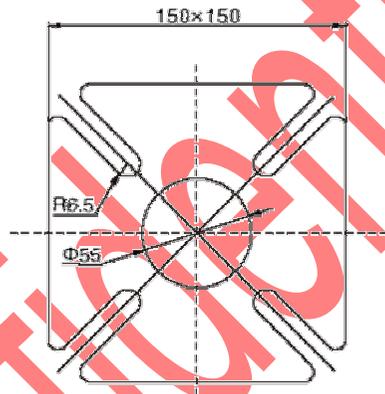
Dimension Chart for Base Installation of SAL-330/360/430/460
